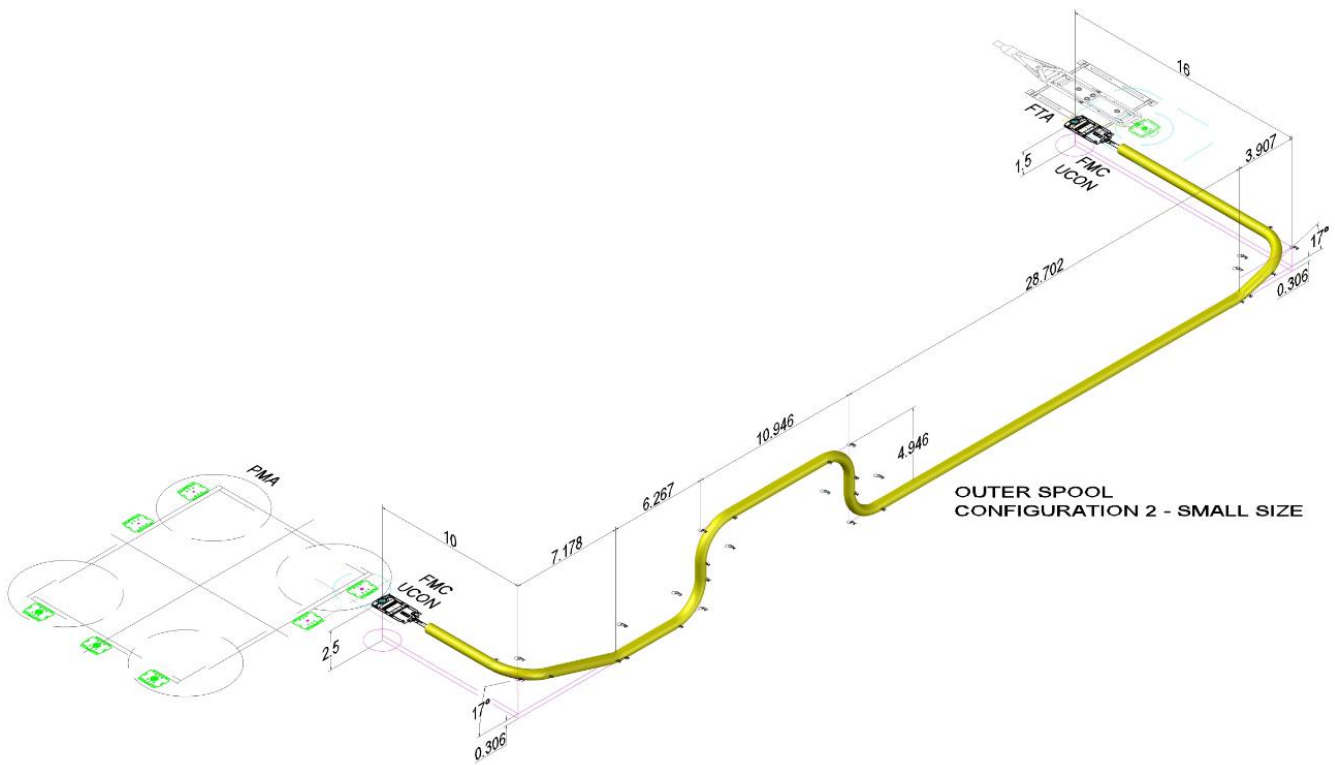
Configuration of Possible Smallest Size of Outer Spool- Configuration 2 based on Installation Tolerances
